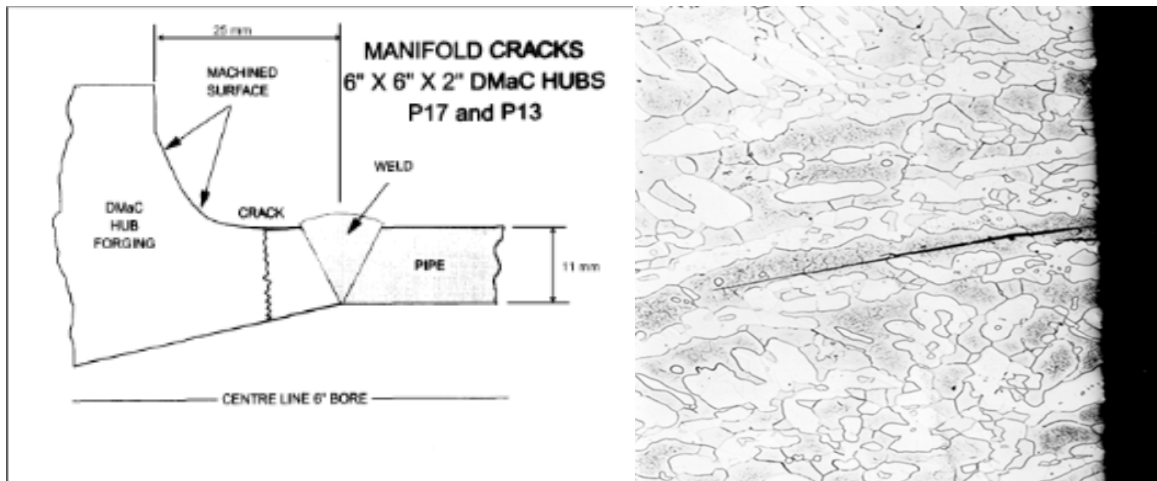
Showing the location and detail of cracking found in the hub forgings.
